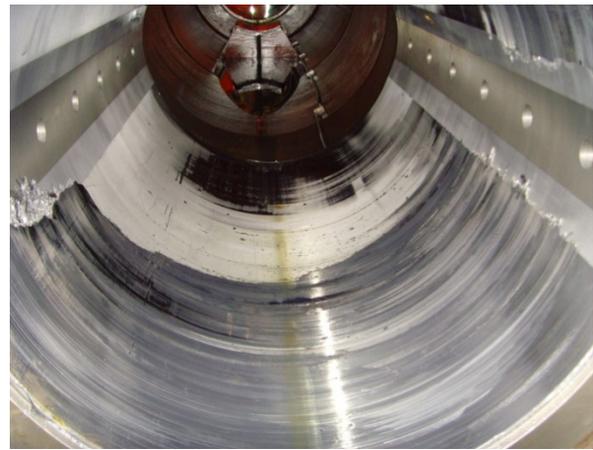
Damaged Stern tube Bearing – Center of Pressure at Aft End
